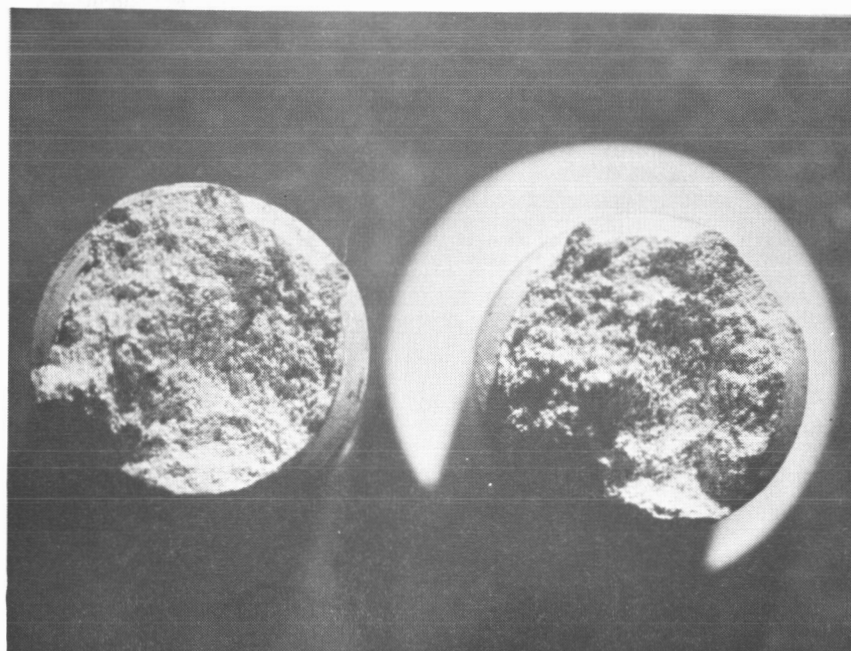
FRACTURE SURFACES, SPECIMEN 2, 8X
